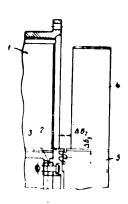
A Portion of Oil Lines for Center and Rear Bearing Housings
